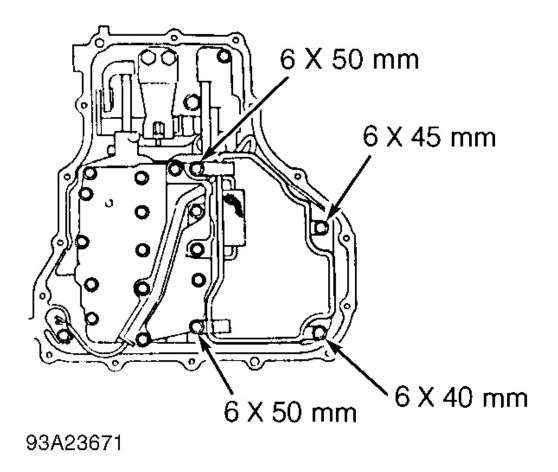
Lower Valve Body Assembly & Fluid Strainer Bolts (2 of 2) Courtesy of AMERICAN HONDA MOTOR CO., INC.
